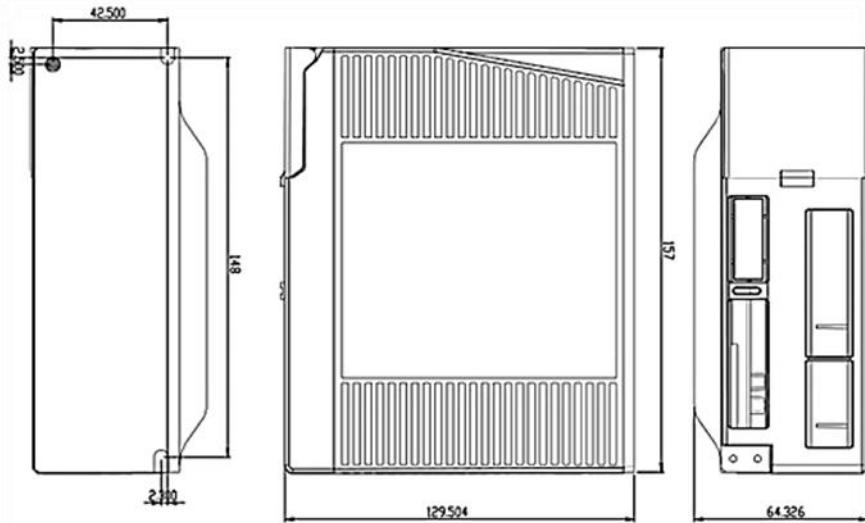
Machine dimension of JMC 2HSS858-R/RC Drive (unit: mm)
